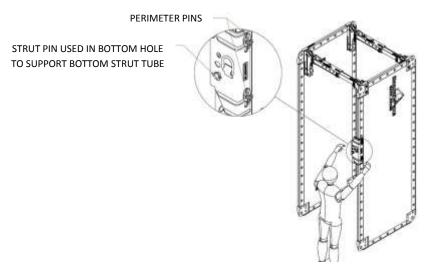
Assembly Step Nine – Install First Bottom Clip On Lugging
